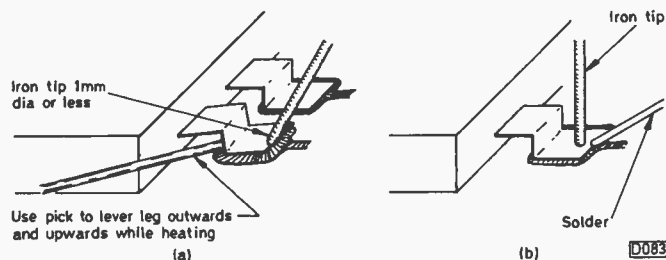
(a) Unsoldering a surface-mounted chip. Leave each leg bent upwards to enable the pick to reach the next one. (b) Soldering a surface-mounted chip.
